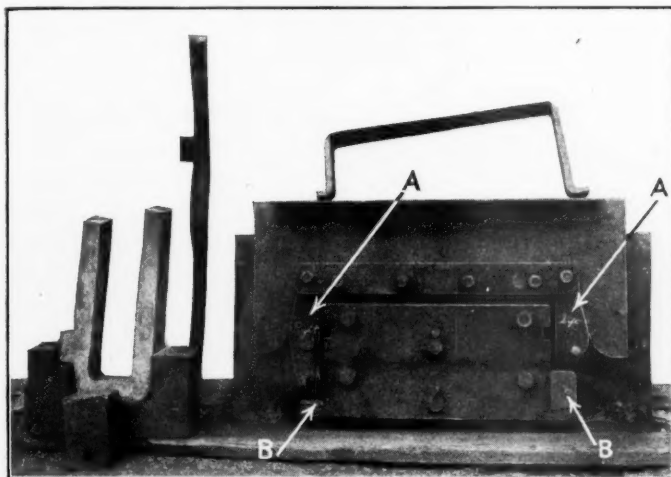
Dies for Bending Main Rod Straps under a Steam Hammer and for Forging Coal Car Hopper Carrier Irons.
